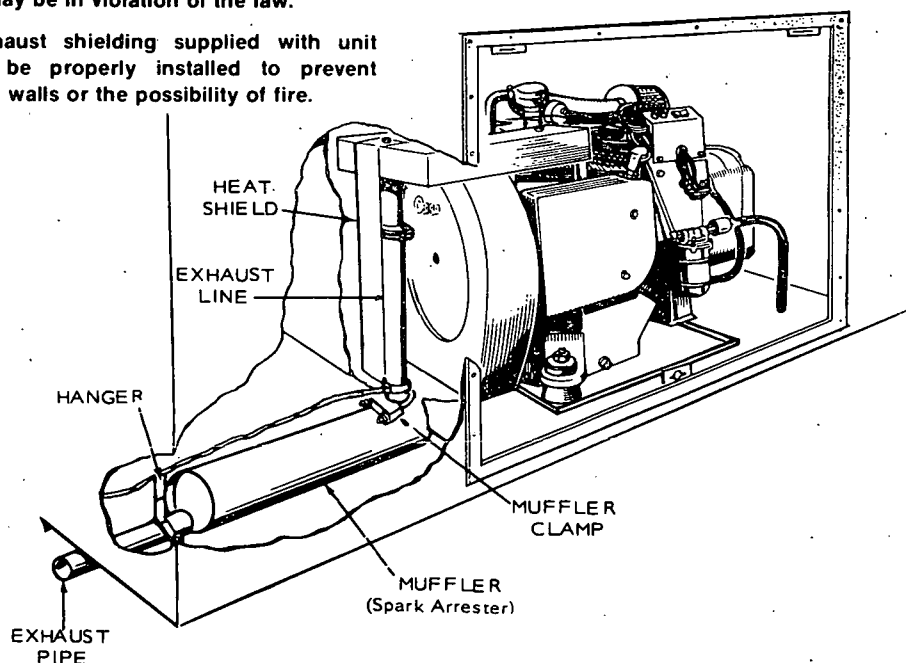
TYPICAL EXHAUST SYSTEM INSTALLATION
